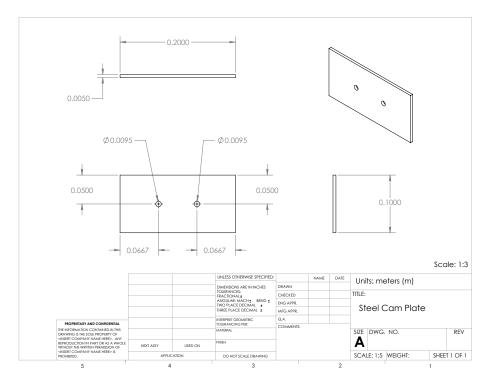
A SolidWorks drawing for the steel plate of the cam system.
